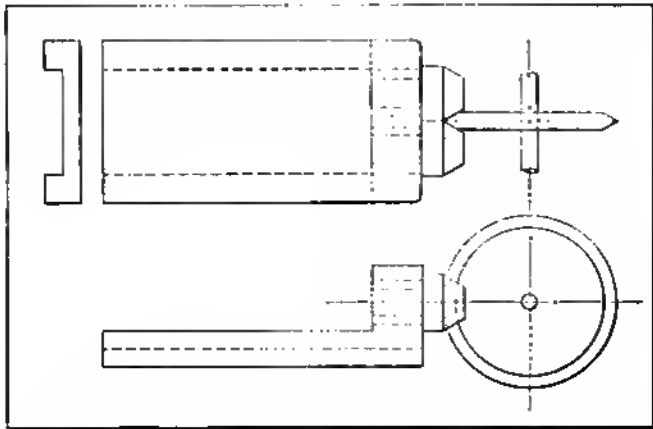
Fixture for charging Rotary Laps of the Type used on the Machine shown in Fig. 6
